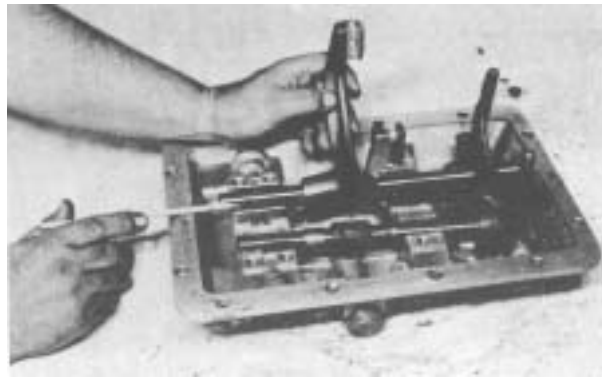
Remove 2nd & 3rd shift fork and rail assembly.
